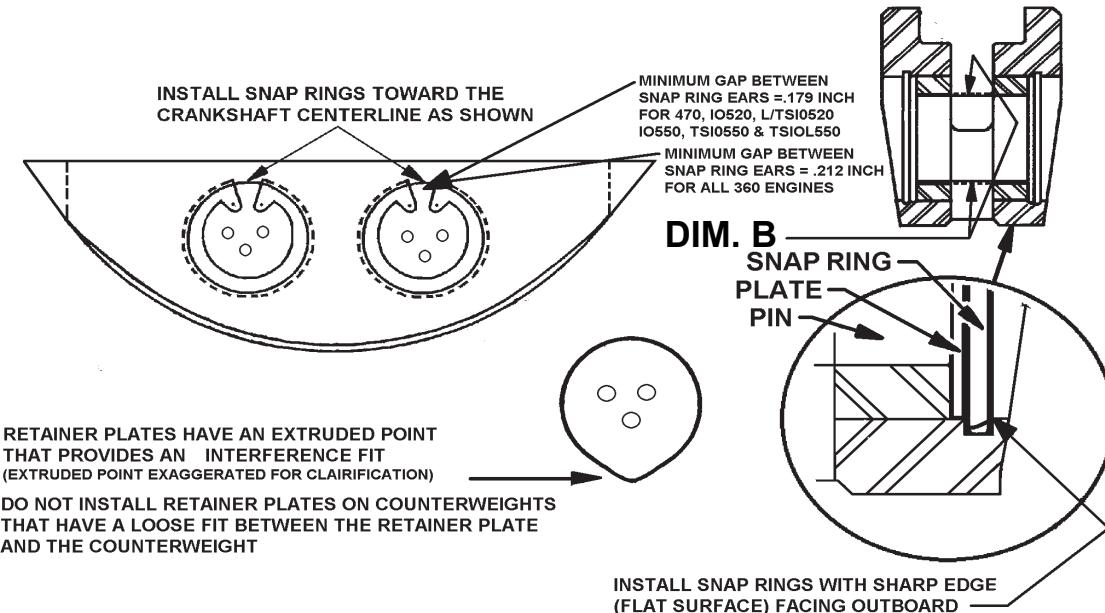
Crankshaft Counterweight Bushing Dimensions
